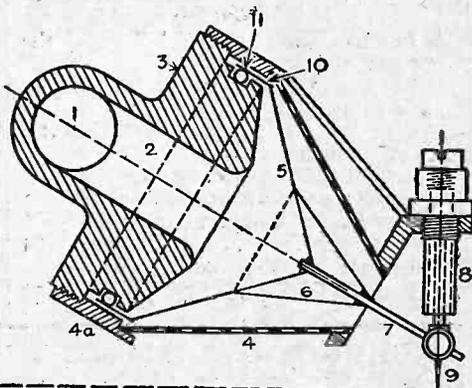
1 is an acoustic duct, leading to 2, Duct in tone arm forming first part of acoustic tube. 3, Main Casting. 4, Conical guard (perforated metal) held by 4a, Screwed ring. 5, Conical diaphragm or "piston." 6, Conical piston extension. 7, Piston rod, connecting to 8, Needle holder, and 9, Needle. 10, Piston skirt, supported by 11, India-rubber rolling ring or obturator.
